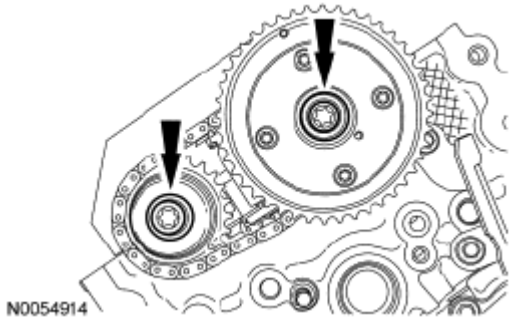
Locating VCT Assembly Bolt & RH Exhaust Camshaft Sprocket Bolt
